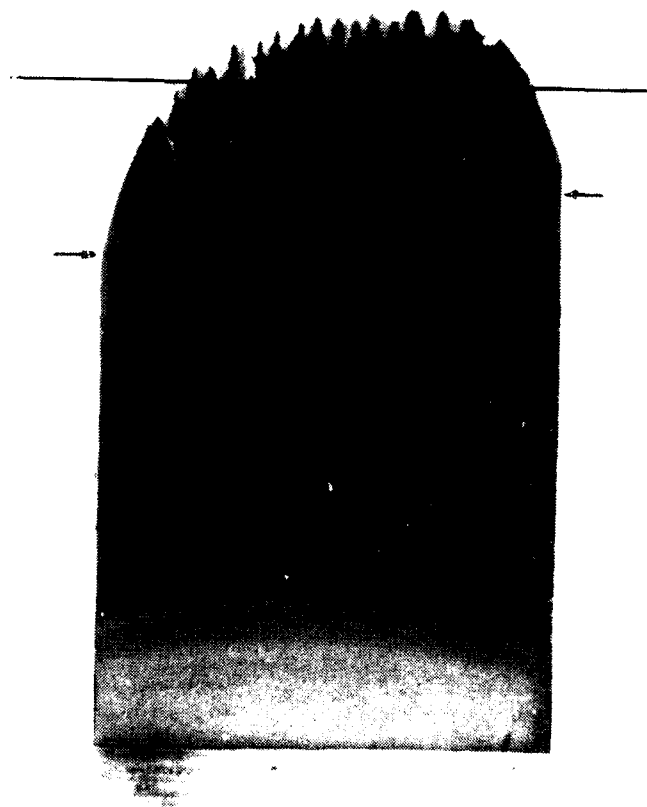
Fracture Surface - CT Specimen 19-3
